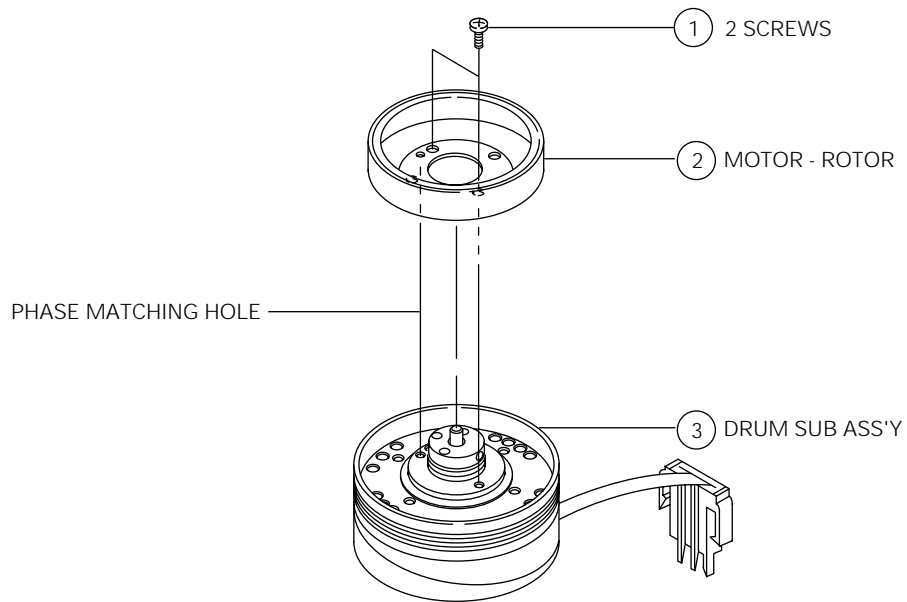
Assembly of Motor Rotor and Cylinder Sub Ass'y
